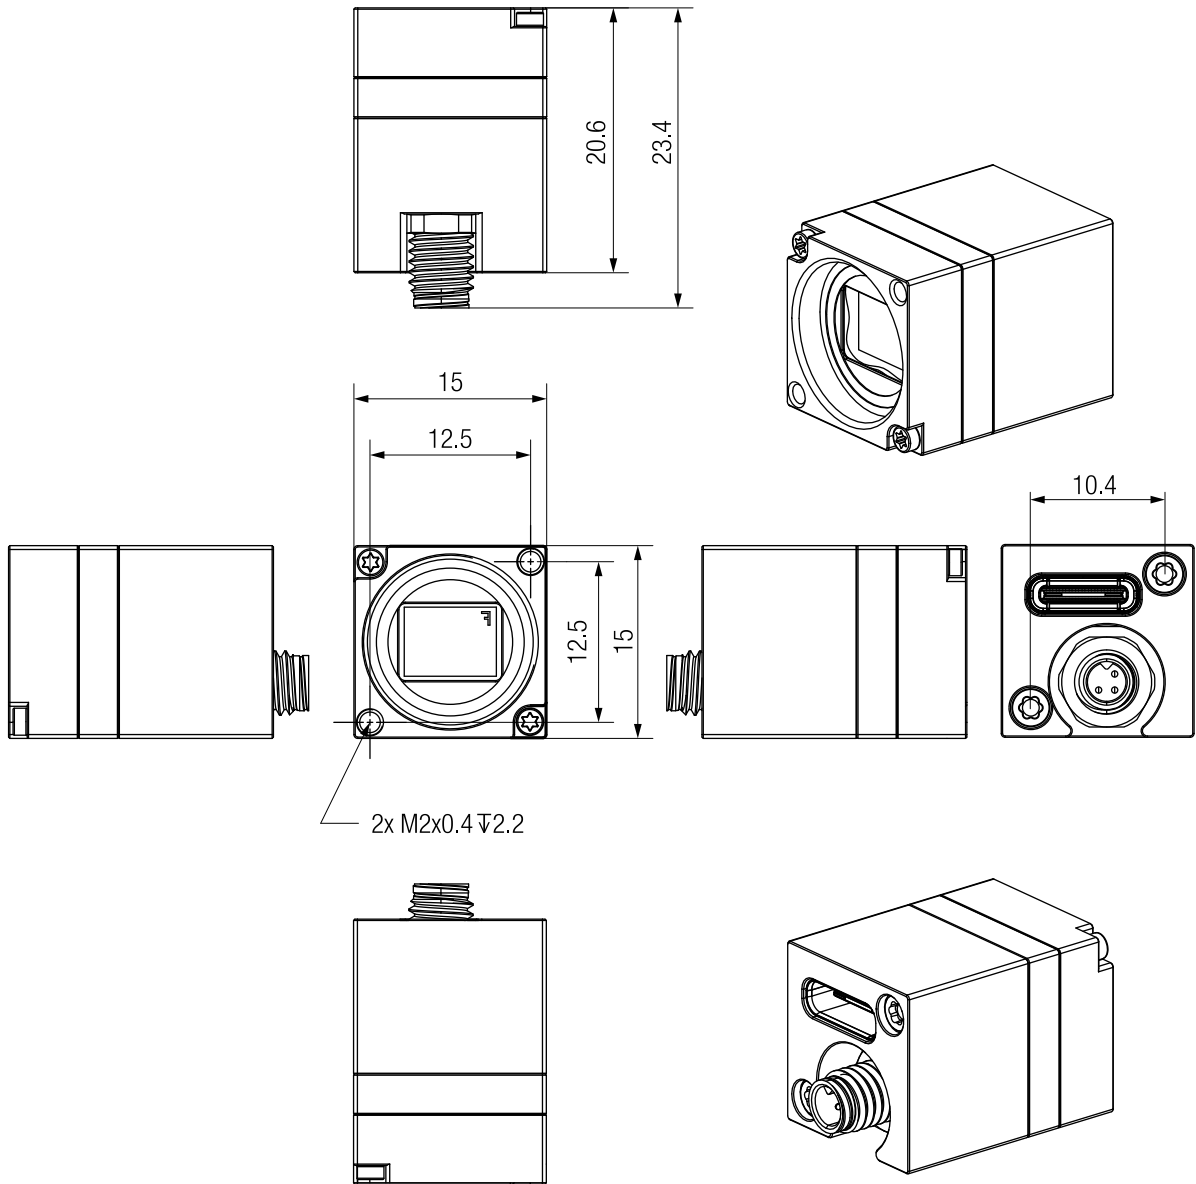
Dimensional drawing of MU196xR-ON with ADPT-MU-CX3-TC-V adapter
